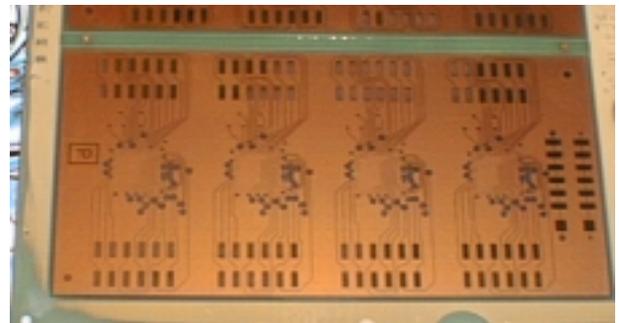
Photograph of (part of) a manufactured FC test board with one ORMOCER-dielectric layer plus metallization (Cu/Ni/Au) on a PCB-substrate with plugged vias. An additional ORMOCER soldering mask layer has been used.
